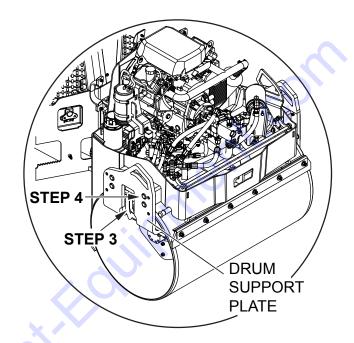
shows the removal of the exciter assembly from the right side of the front drum.
